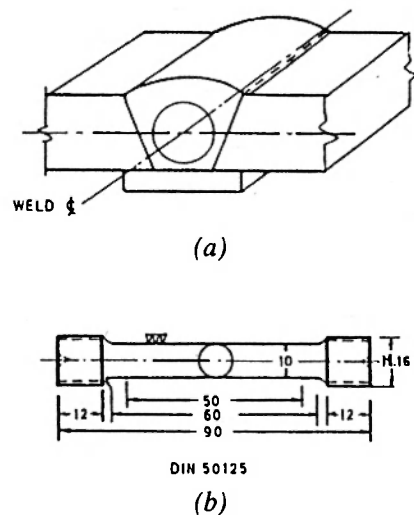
Location and directions of all weld metal tension specimen
